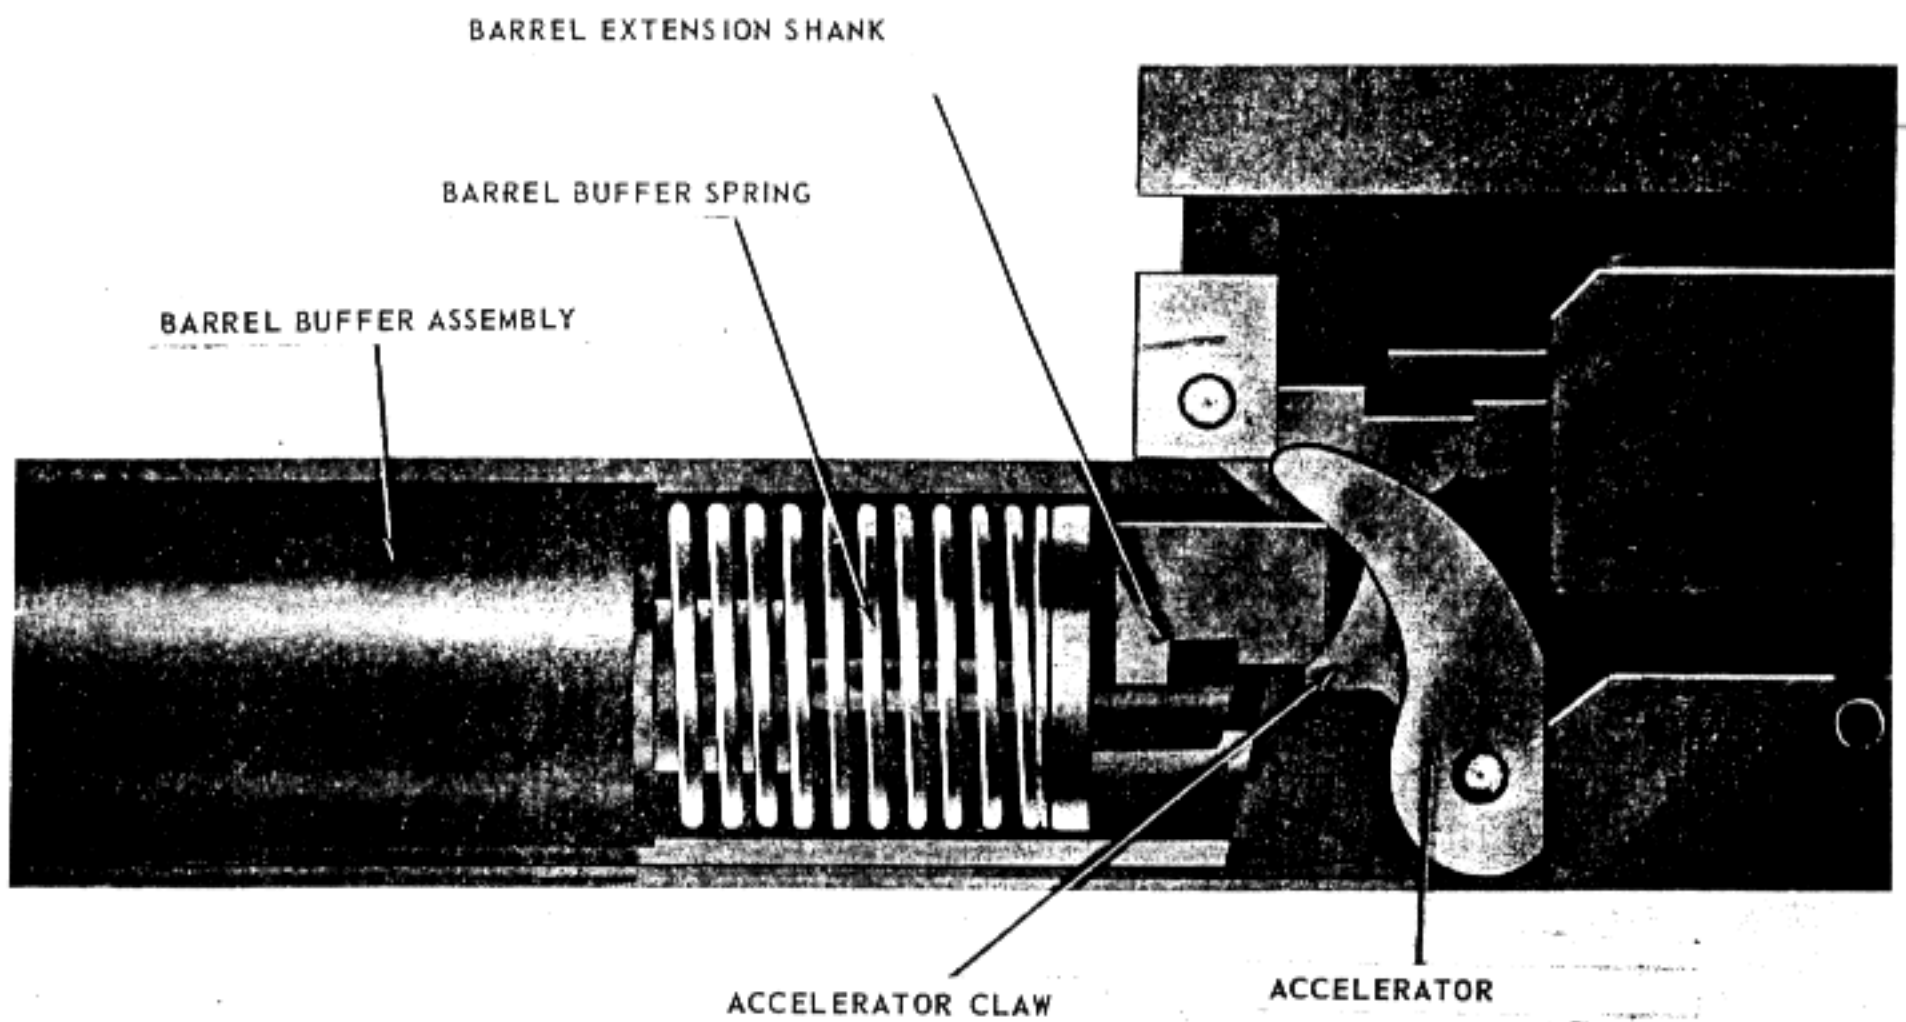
Unlocking—barrel buffer spring compressed and locked.
